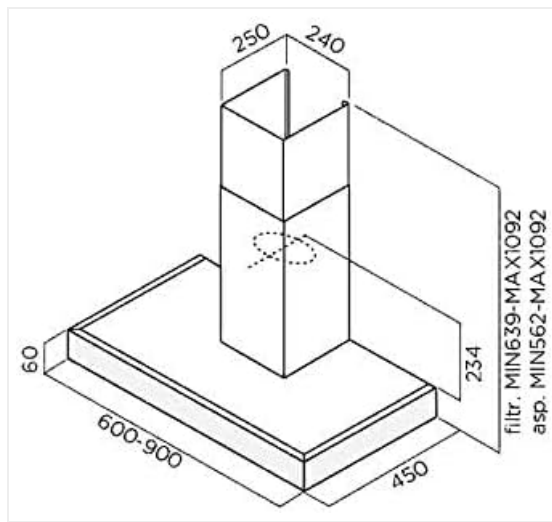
Dimensional drawing of the Baumatic BMECH6WSS chimney hood, showing measurements for installation. Dimensions are in millimeters.
